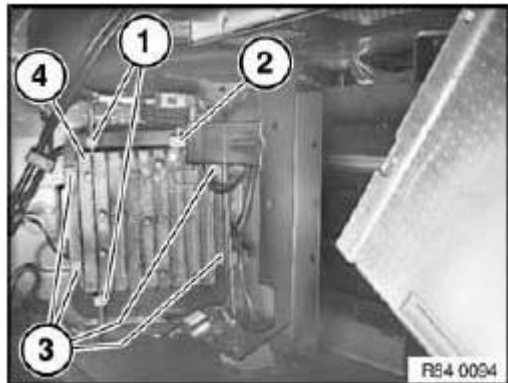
Identifying Antenna Plug, Plug Connection, Screws And Compensator
